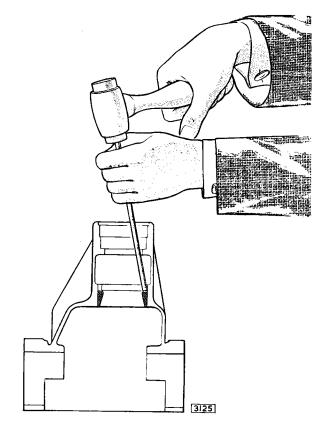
Driving out the pinion bearing outer race if the special tool is not available.
